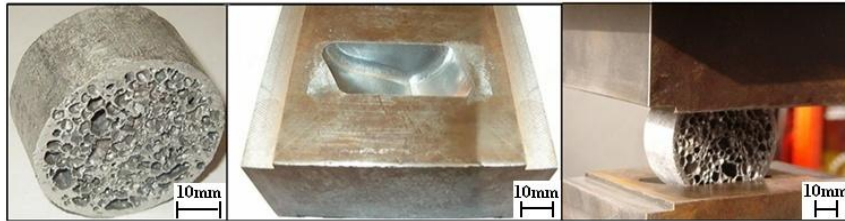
Initial foam billet (left), bottom die (middle) and initial forging sequence (right) [16].
